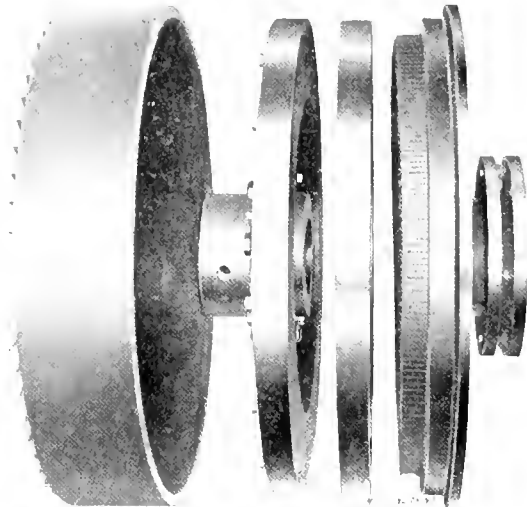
Parts of Magnetic Accelerator in their Proper Relation.
